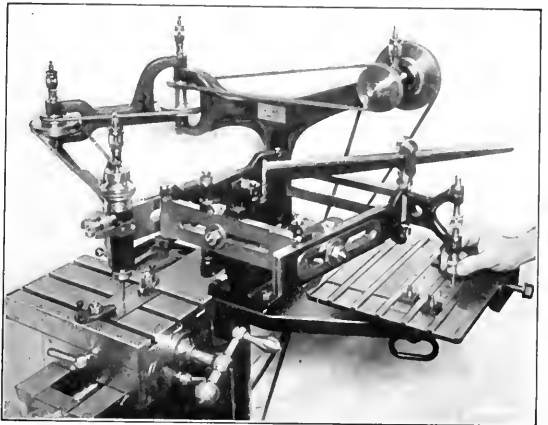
Tables and Mechanism of Machine shown in Fig. 1
